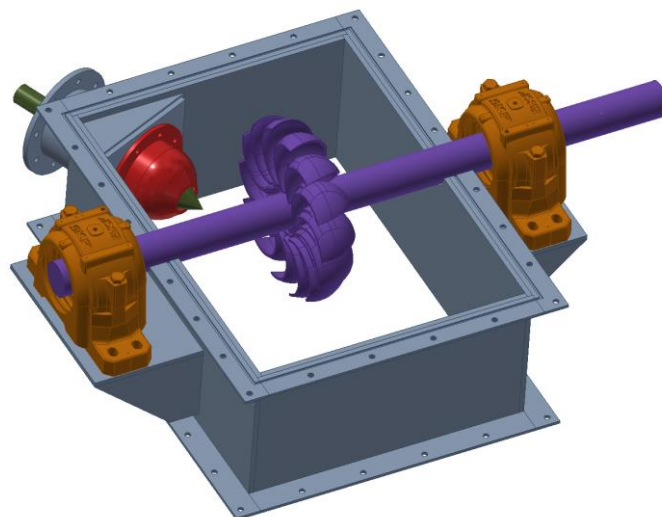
Indicative CAD model of the Turgo turbine.
